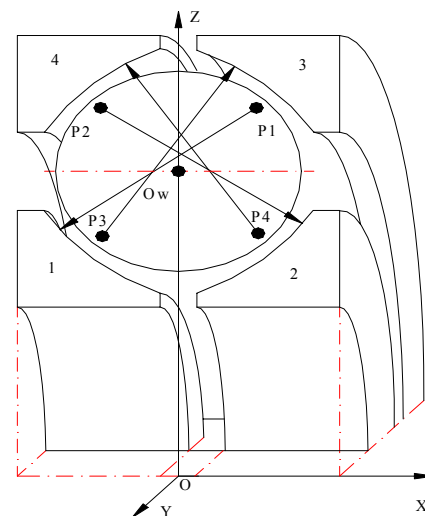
Schematic view of a 4 points contact ball bearing (4PCBB).
